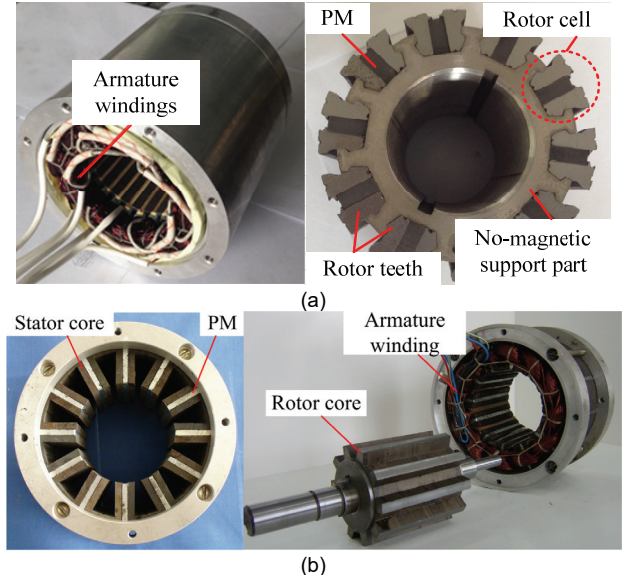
The prototypes of two FS machines. (a) 24s/10p RPM-FS machine. (b) 12s/10p SPM-FS machine.
